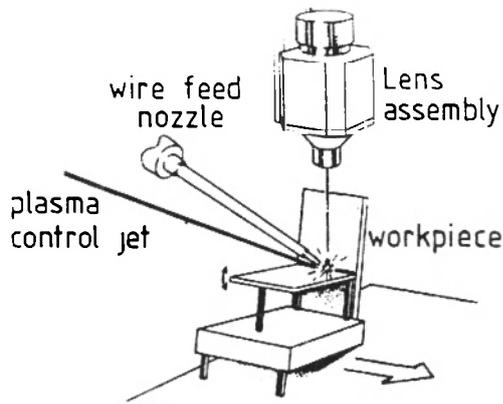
Laser welding with wire feed-experimental set-up
